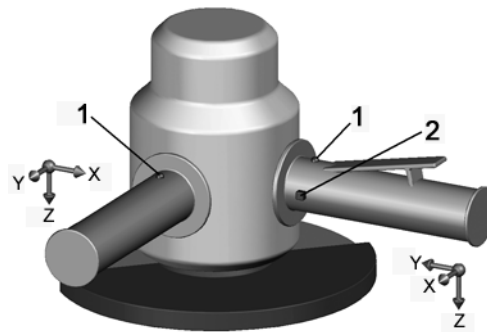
Measurement locations — Pneumatic angle grinder whose motor serves as main handle
